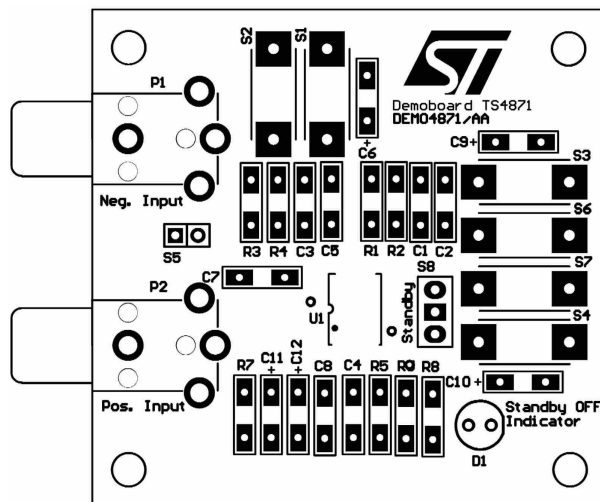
SO8 and MiniSO8 demoboard top solder layer
